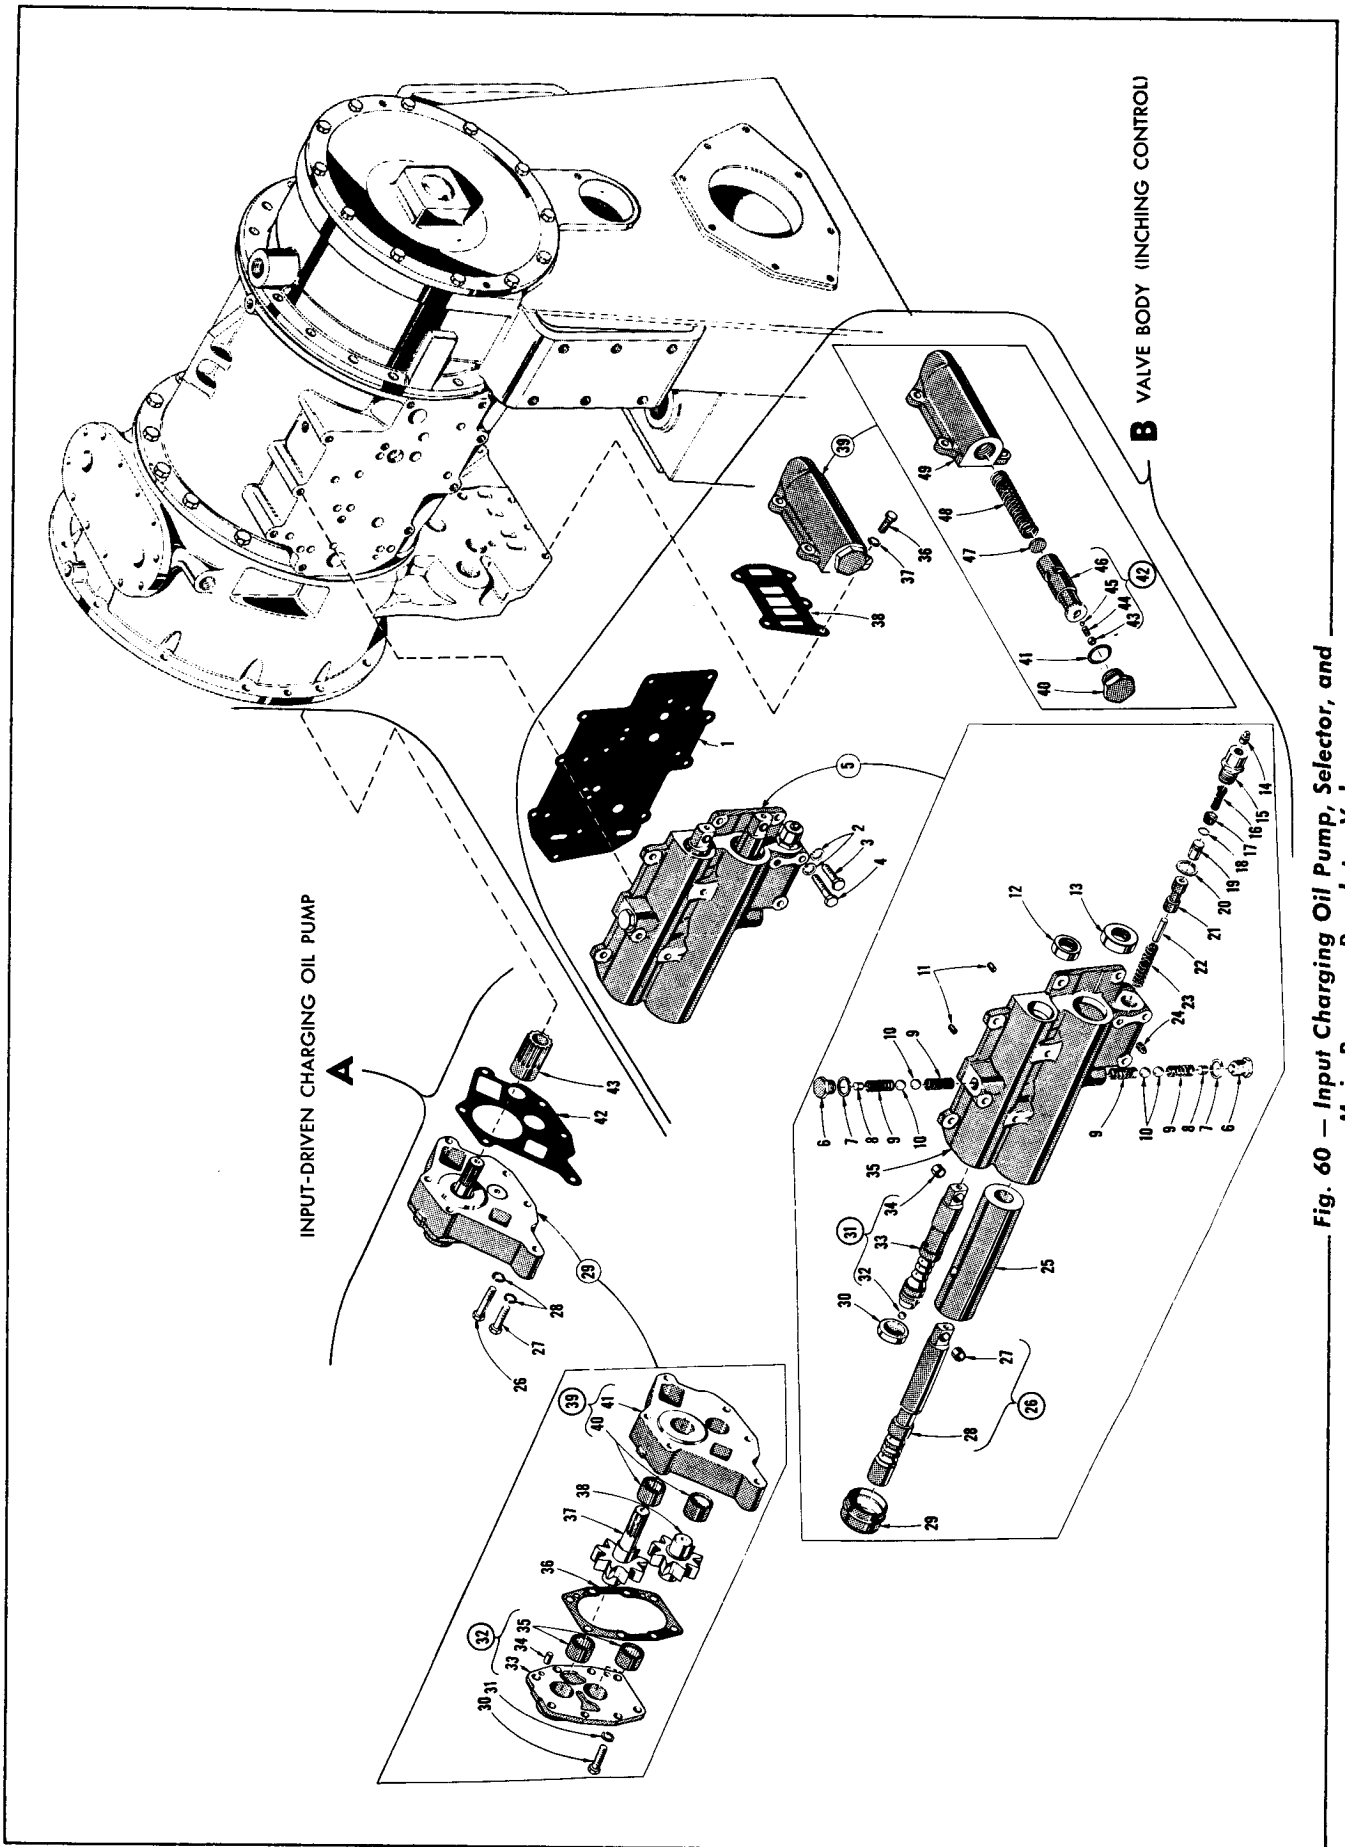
Input Charging Oil Pump, Selector, and Main Pressure Regulator Valves
